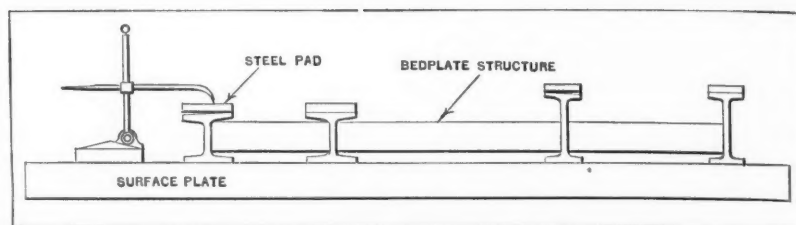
Using Steel Pads for Leveling Supporting Surfaces
